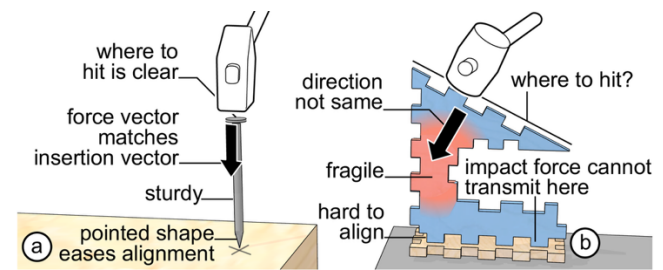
(a) While nails have been carefully engineered for being hammered, (b) laser-cut 3D models are not.
